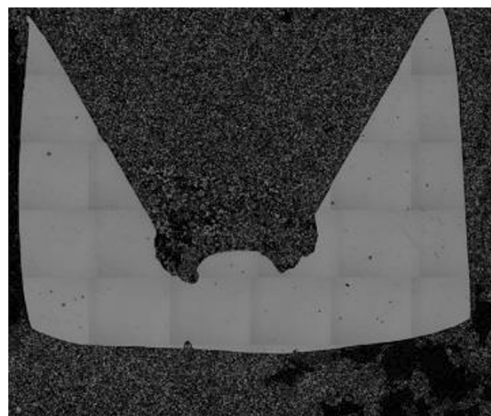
Typical weld bead geometry for sample deposited with a heat input in the lower quartile of the heat input range of interest. Deposition with a low preheat resulted in the formation of a weld with a produced weld toe and consequently a hydrogen crack
